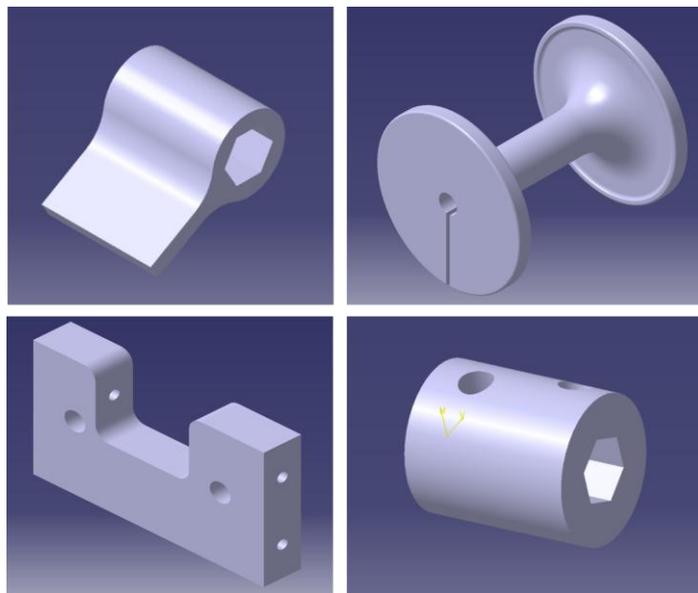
CAD Components. Figure 2 consists of CAD components intended for mechanical integration between the stepper motors and the window blind assembly. These components enable precise motion transfer required for automation. (Actual components may vary)
